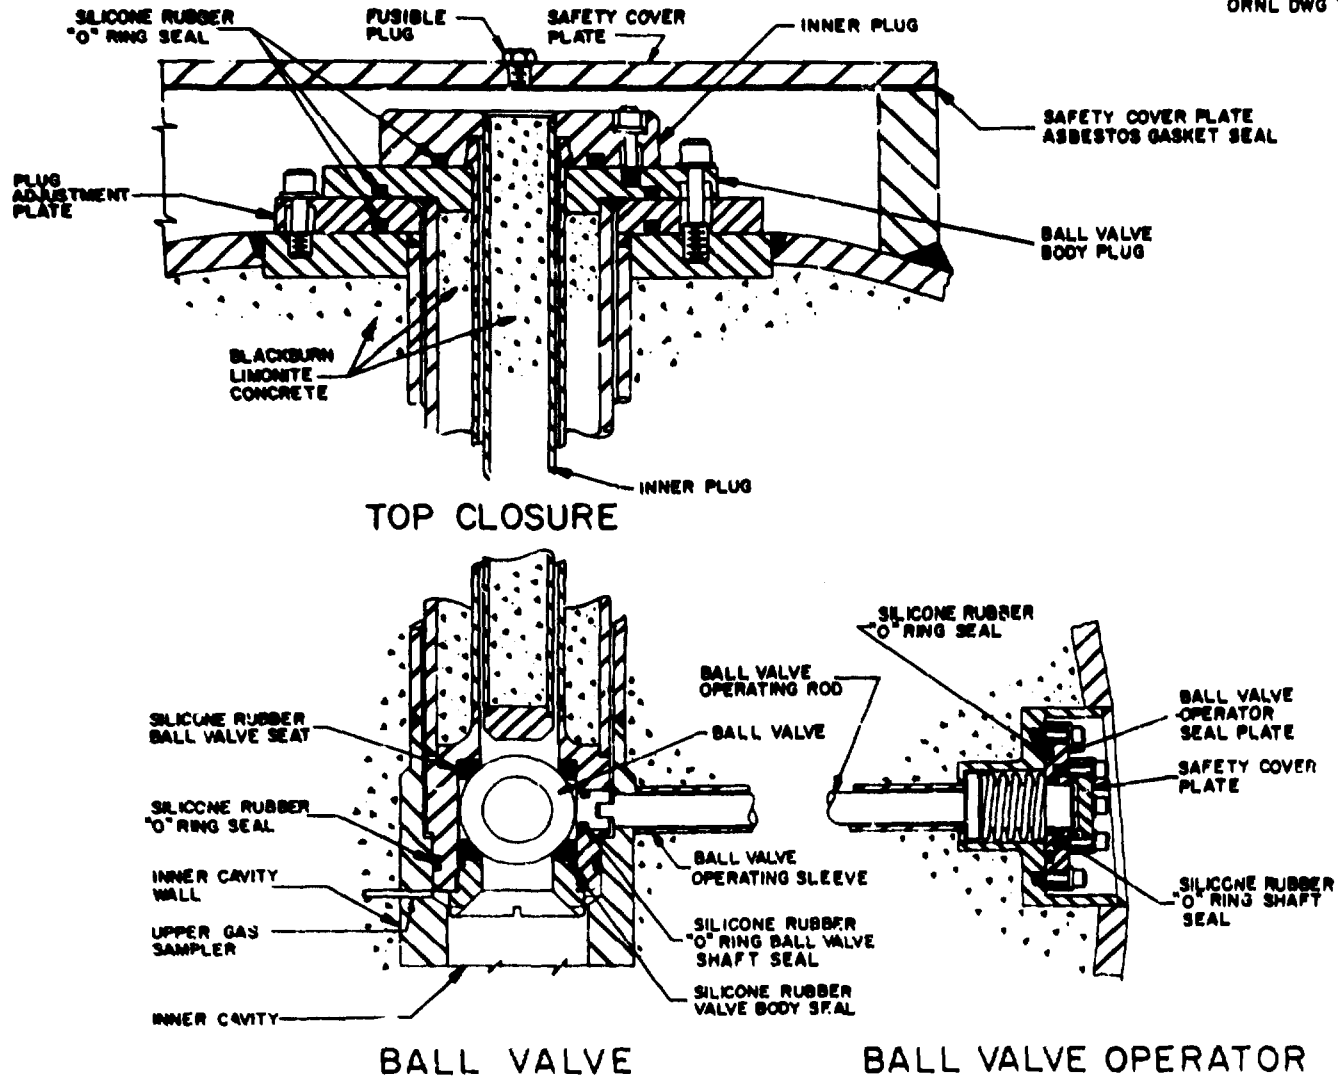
Ball-valve upper closure for loading single-specimen shipment, showing plug and seal arrangement.
